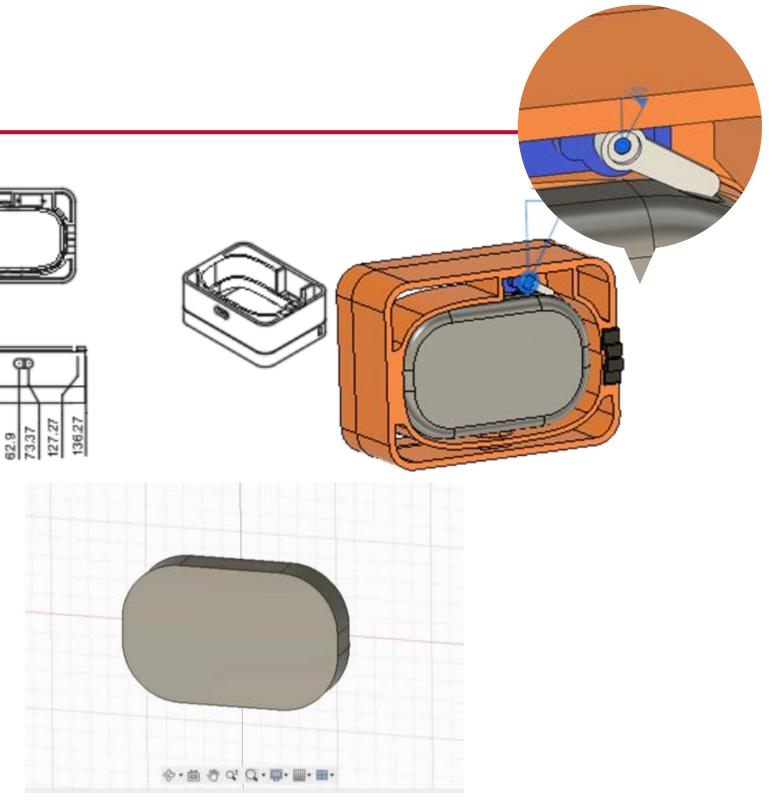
Top, bottom, and right side view of casing (upper left). Angle in which the mechanism travels (upper right). Timelapse of the CAD (bottom).
